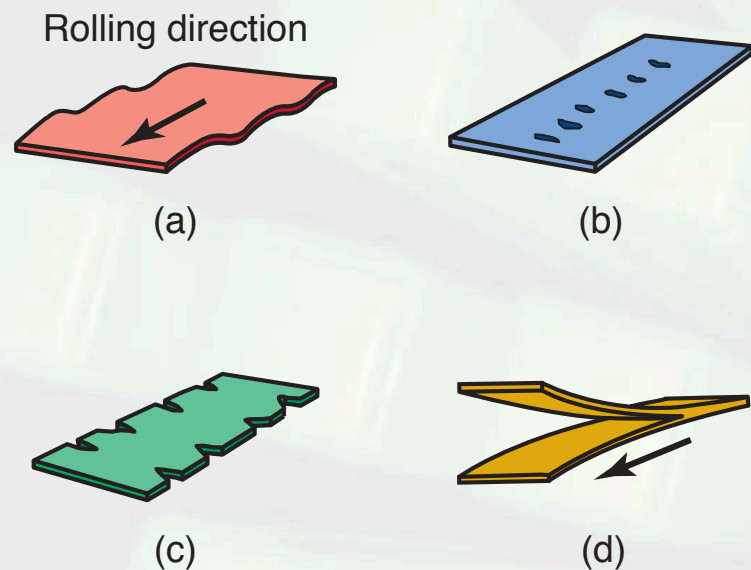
Schematic illustration of some defects in flat rolling: (a) wavy edges; (b) zipper cracks in the center of strip; (c) edge cracks; (d) alligating.
